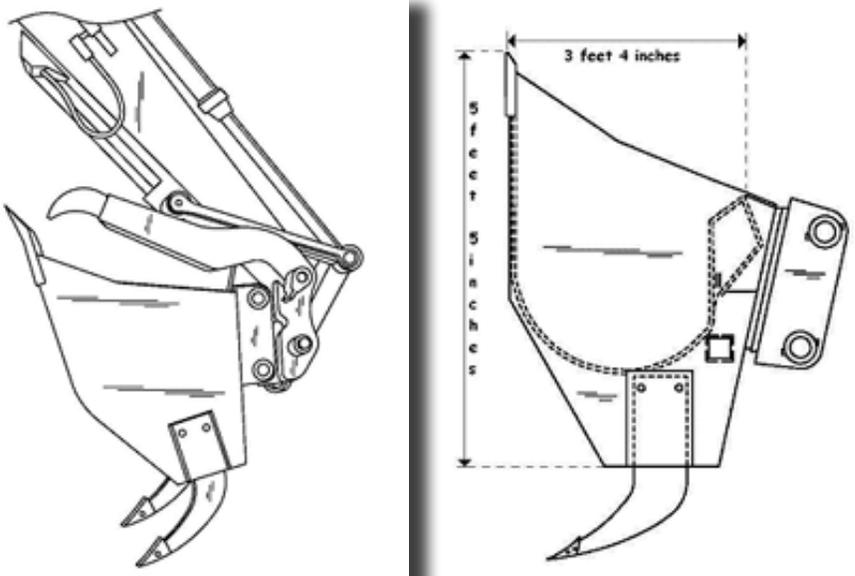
Left is a view of the mounted SEB. Right is a side view showing the bucket and dimensions of the implement.
